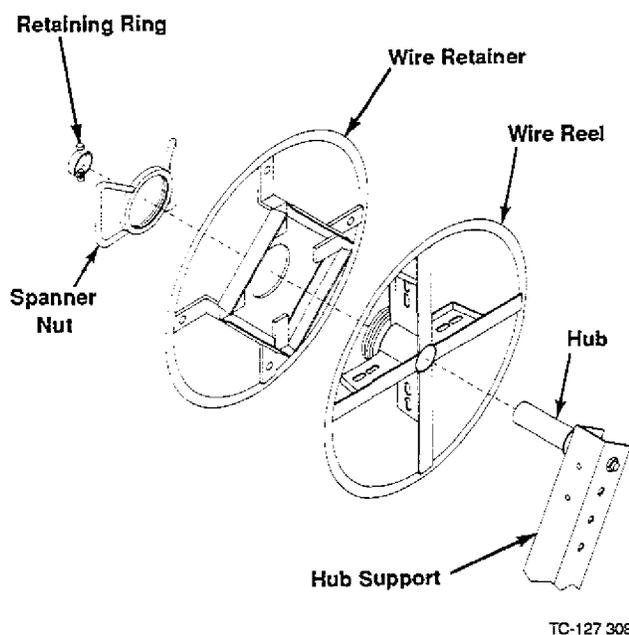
Optional Wire Reel And Reel-Type Wire Installation
